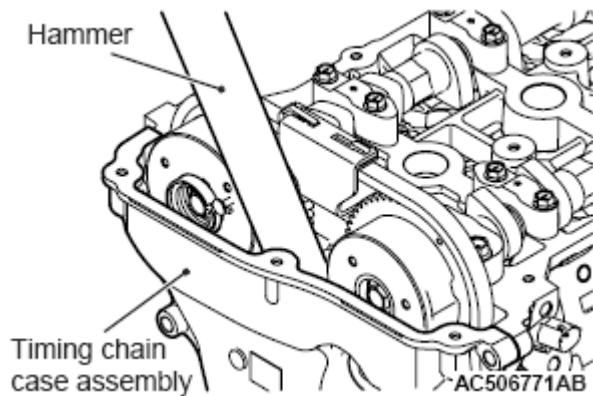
Inserting Wooden Hammer Shank Into Timing Chain Case Assembly
